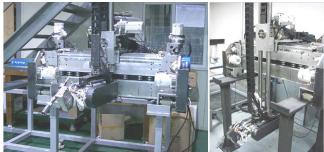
Manufactured 'Rail Runner' welding robot
